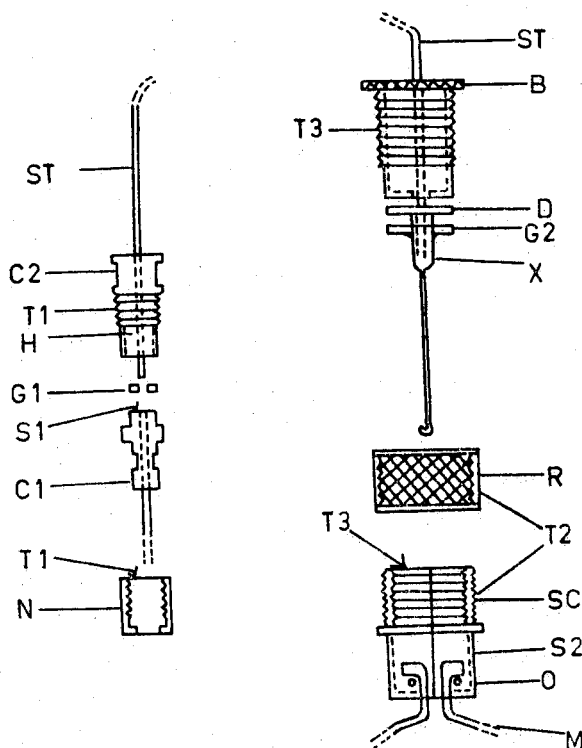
Dilatometer sealing attachments. The stainless steel connector C1 on the tubing at the top of the burette is sealed to the stainless steel connector C2 by screwing nut N along the threads T1. This forces teflon gasket G1 into the hole H and on to the flat S1. By screwing brass ring R along threads T2, the split collar SC is fixed below the neoprene O-ring O, placed under the glass head of the mixing vessel M. On rotating bolt B along the threads T3, the stainless steel disk D and teflon gasket G2 are forced on to the flat glass top S2 of the mixing vessel.
